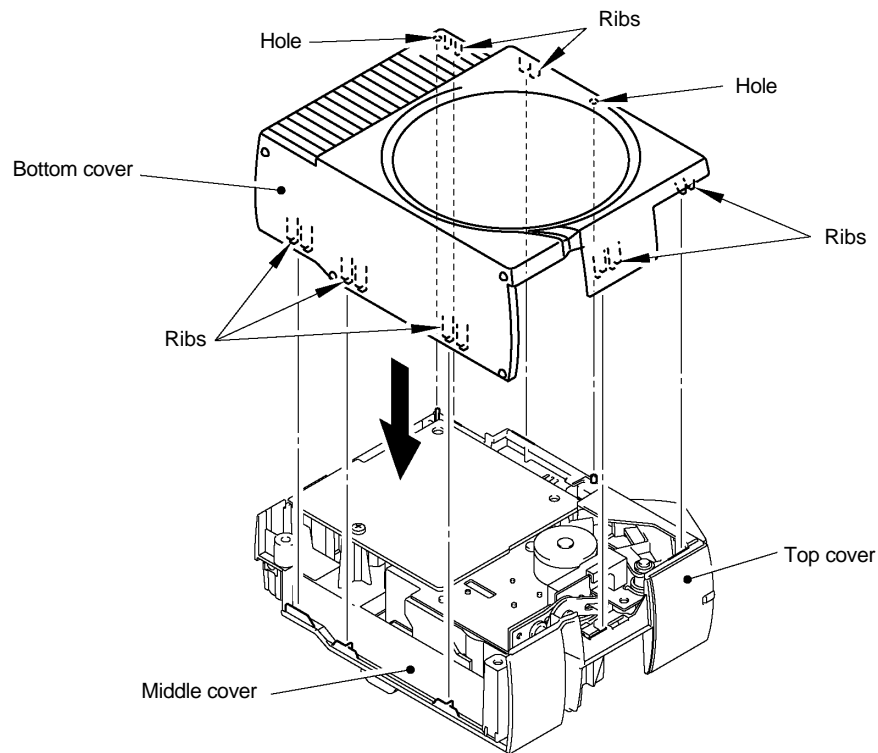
Assembling the Main PCB ASSY (7)
